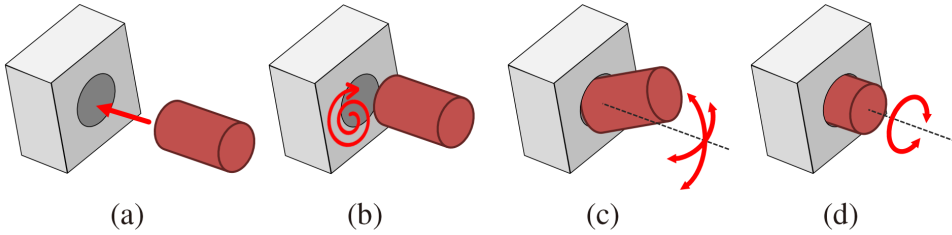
Unit motions for peg-in-hole assembly. (a) Pushing. (b) Rubbing. (c) Wiggling. (d) Screwing.
